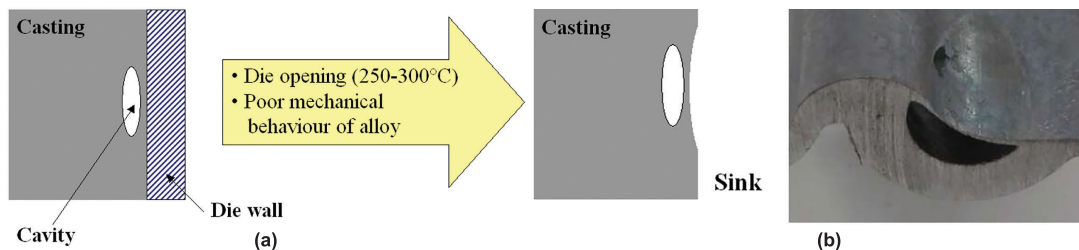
(a) Draft of sink formation and (b) sink appearance on the external surface of casting.¹²
